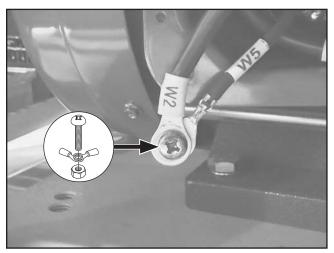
Wires W2 and W5 connected with (1) Phillips head screw and hex nut.
